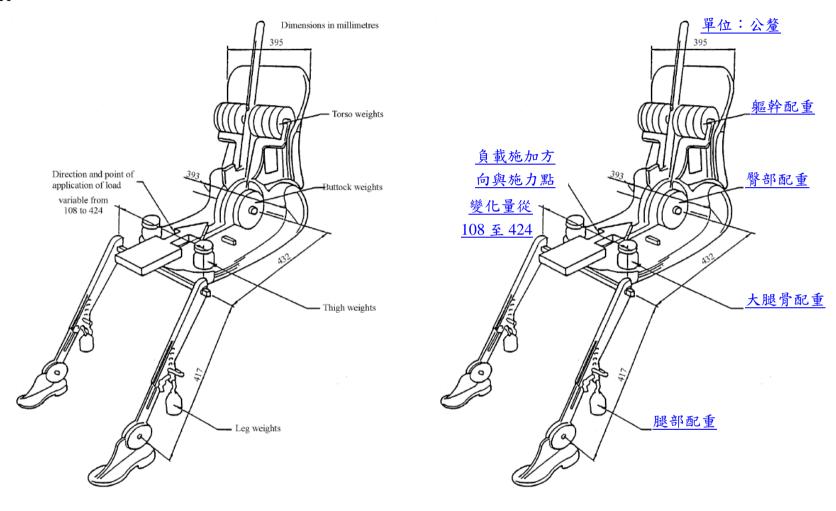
Dimensions of the 3-D H machine elements and load distribution
